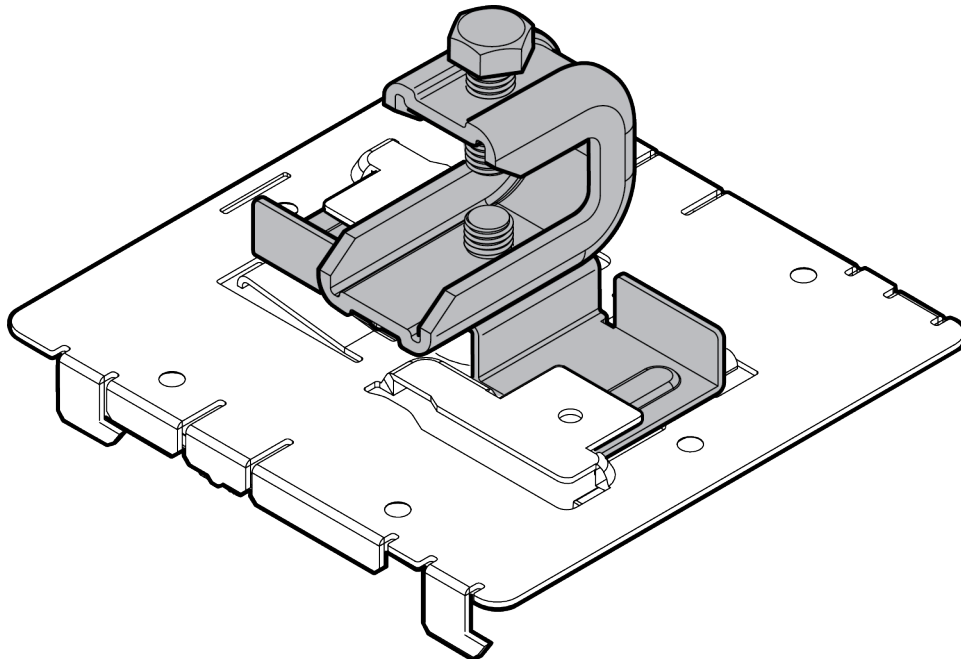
Attaching the beam clip accessory to the main mounting bracket
